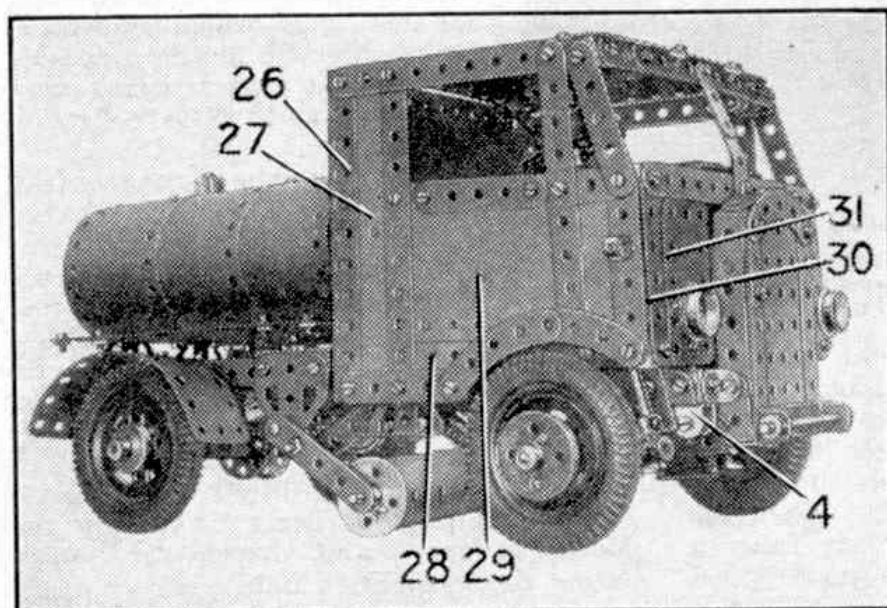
A general view of the Road Sweeper showing details of the cab construction.
